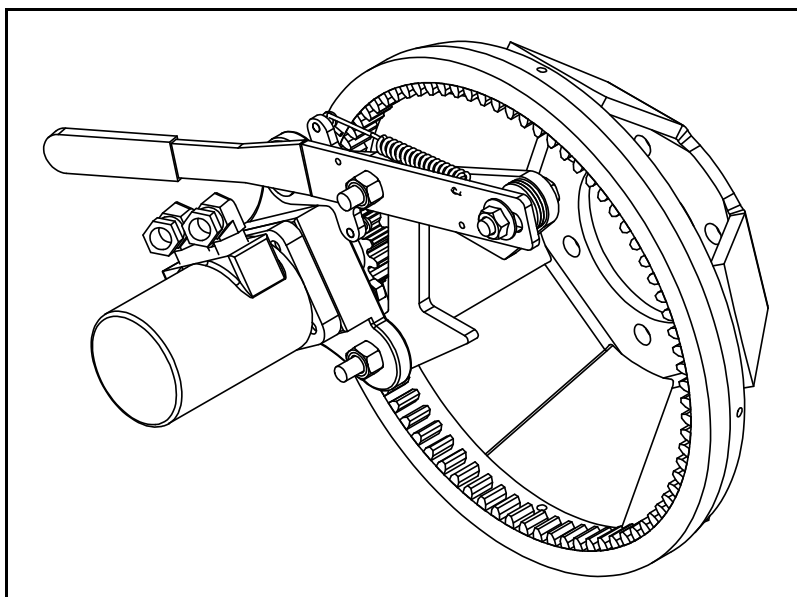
Pinion Gear Adjustment (Left Shown)
